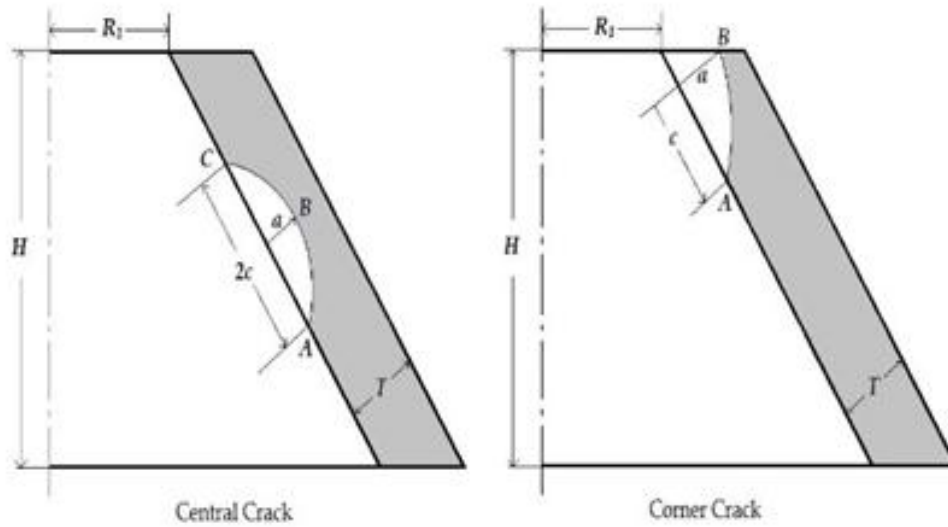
Typical cross-section of the conical shell with an internal semi-elliptical longitudinal central or corner crack.
